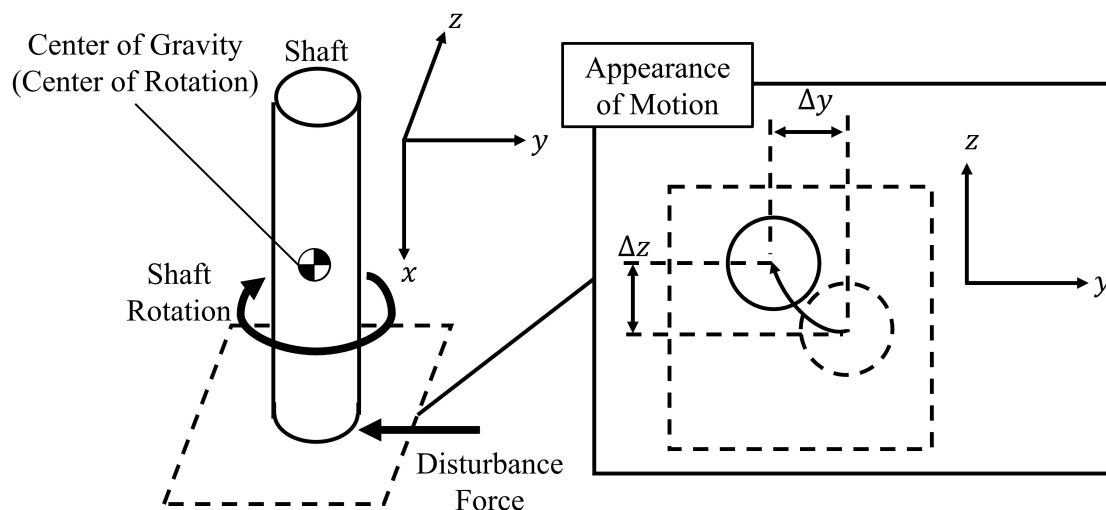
Displacement of rotating spindle rotor when machining load is applied.
